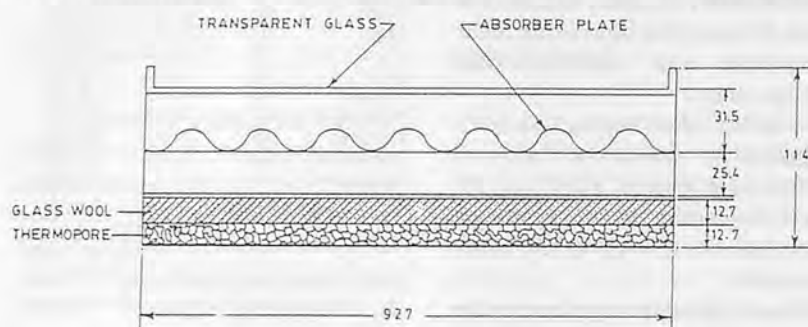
A cross section of a flat plate solar collector (All dimensions are in mm).
